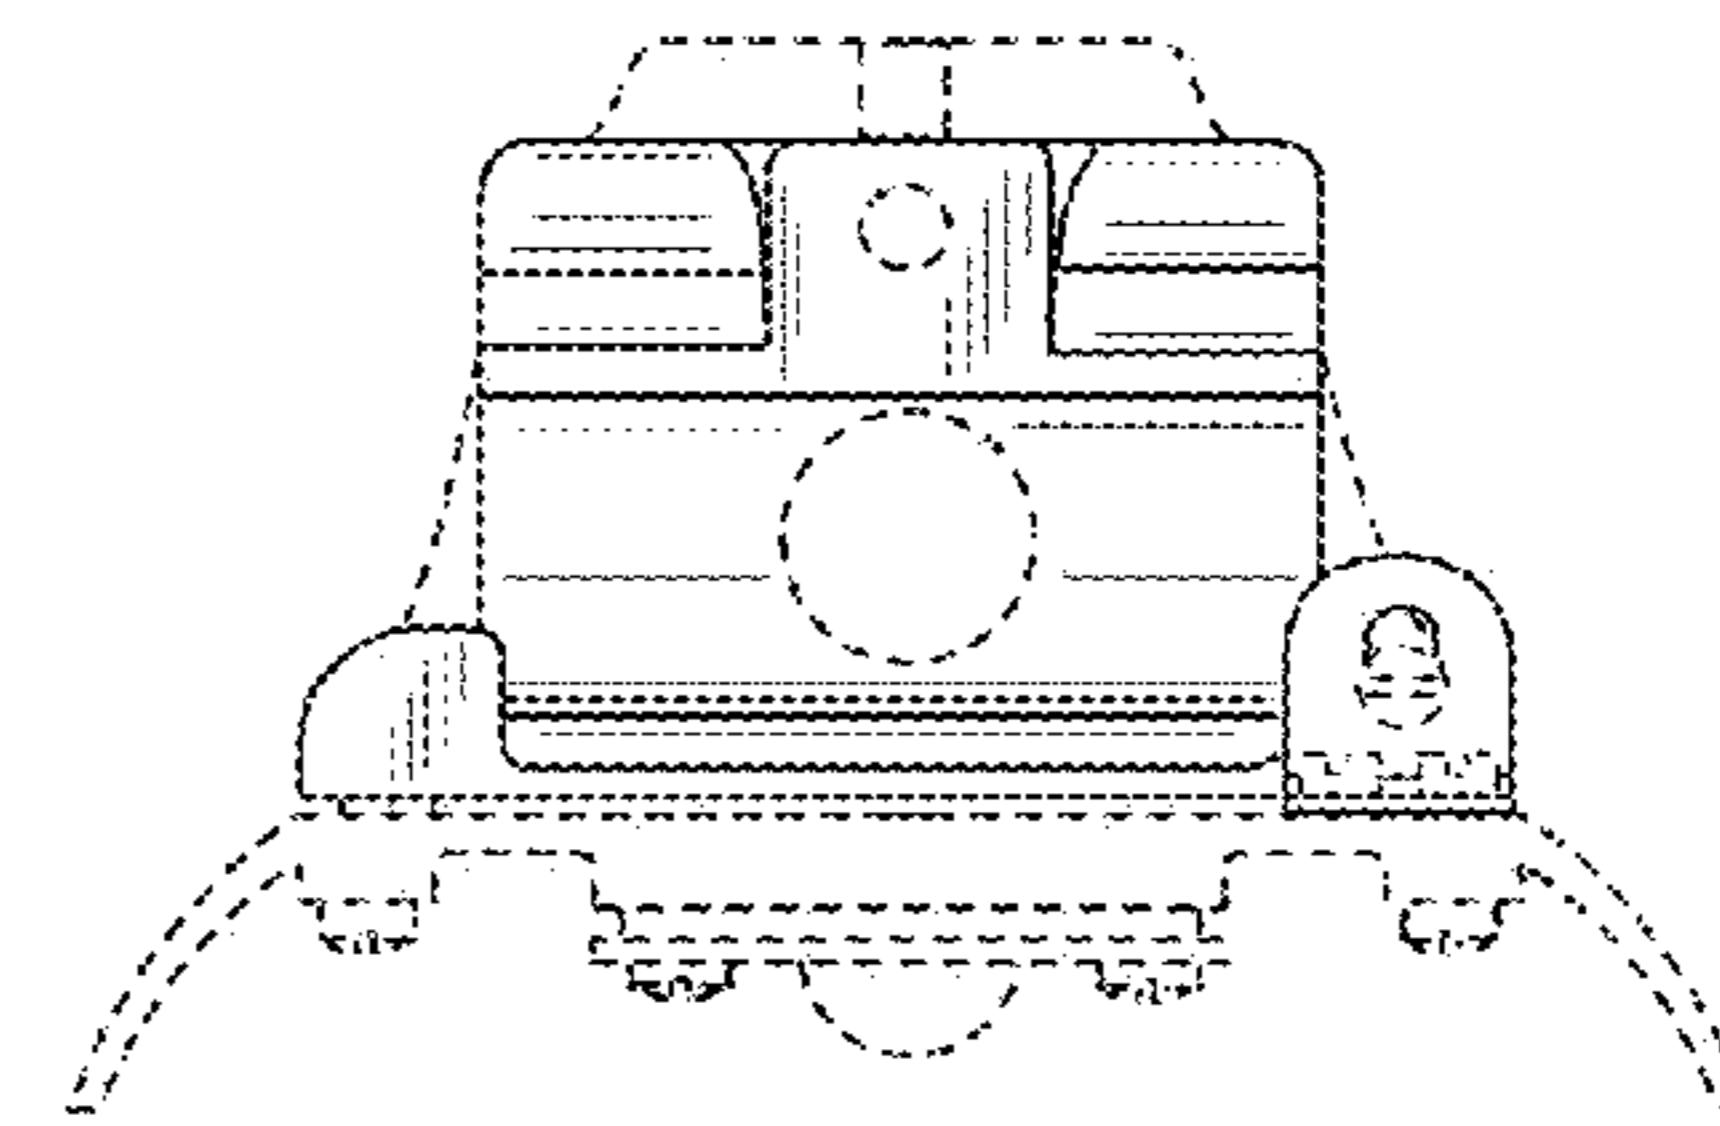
is a front view of the LED lighting housing shown in FIG. 1;
